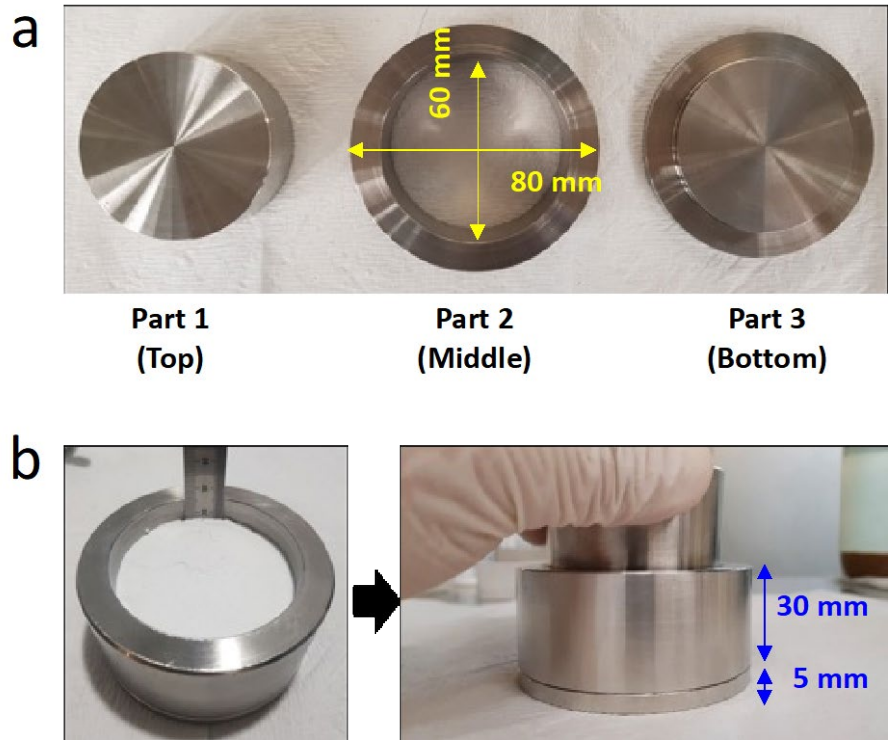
(a) Mould composition and (b) powder addition and mould assembly
